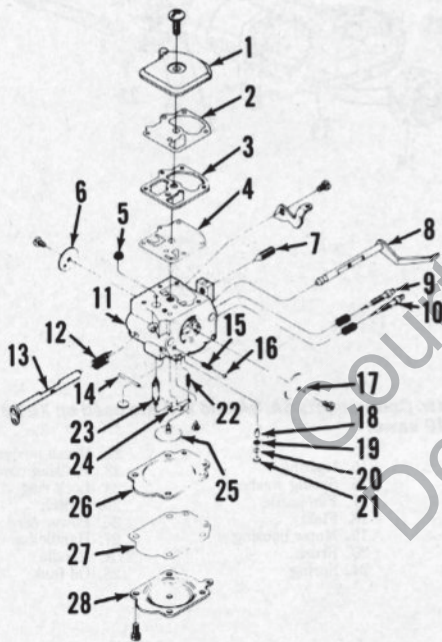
Exploded view of Zama C2S carburetor used on later XL models.
